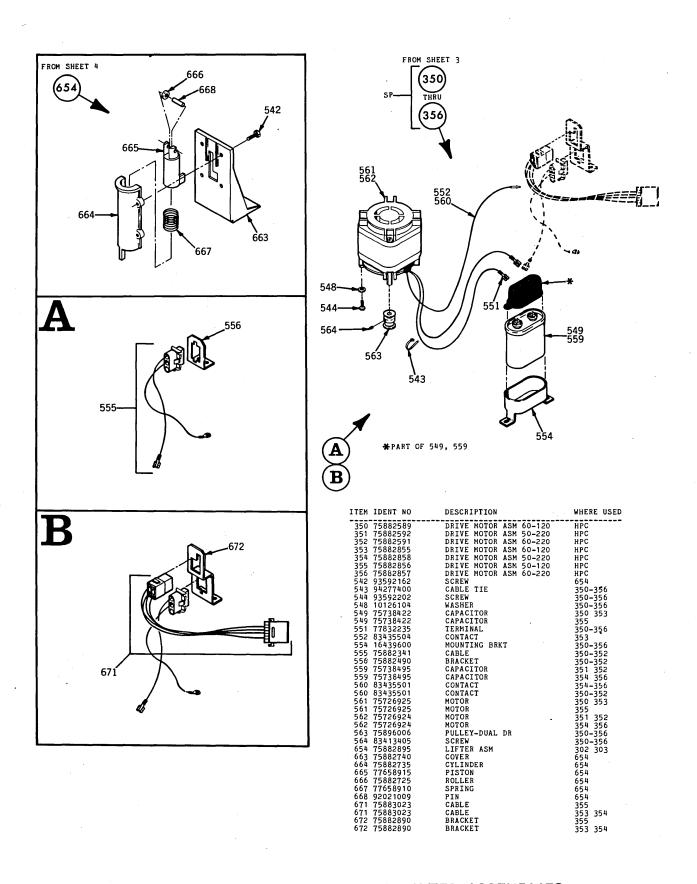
DRIVE MOTOR AND LIFTER ASSEMBLIES
